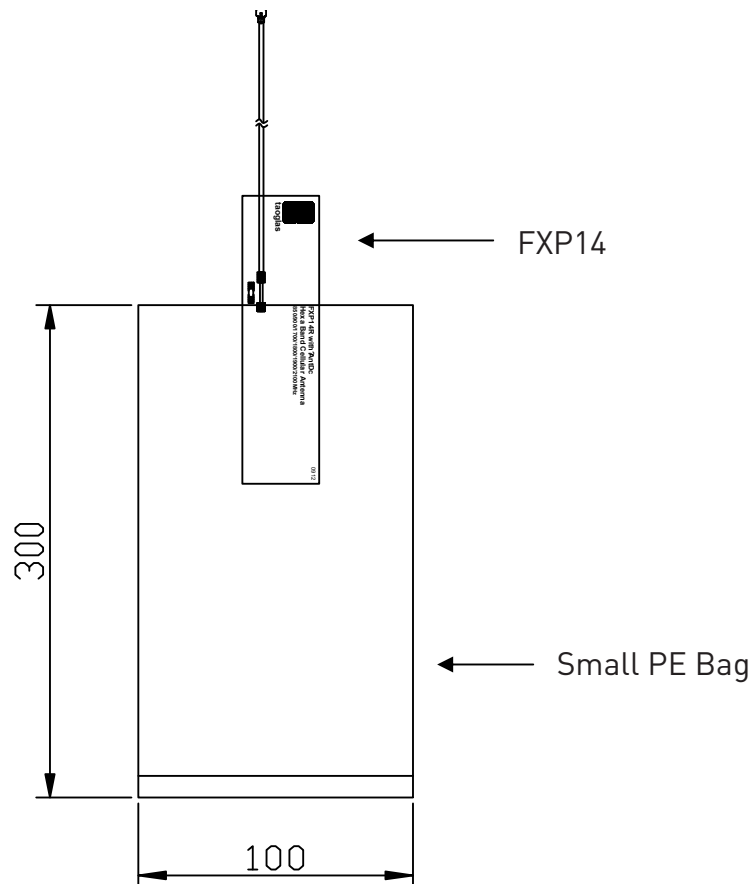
Mechanical Drawing for the FXP14 Antenna
